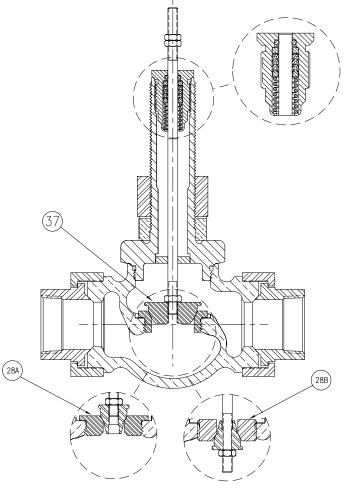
VALVE BODY ASSEMBLY - K5 & K6 - 1/2" - 3/4"
